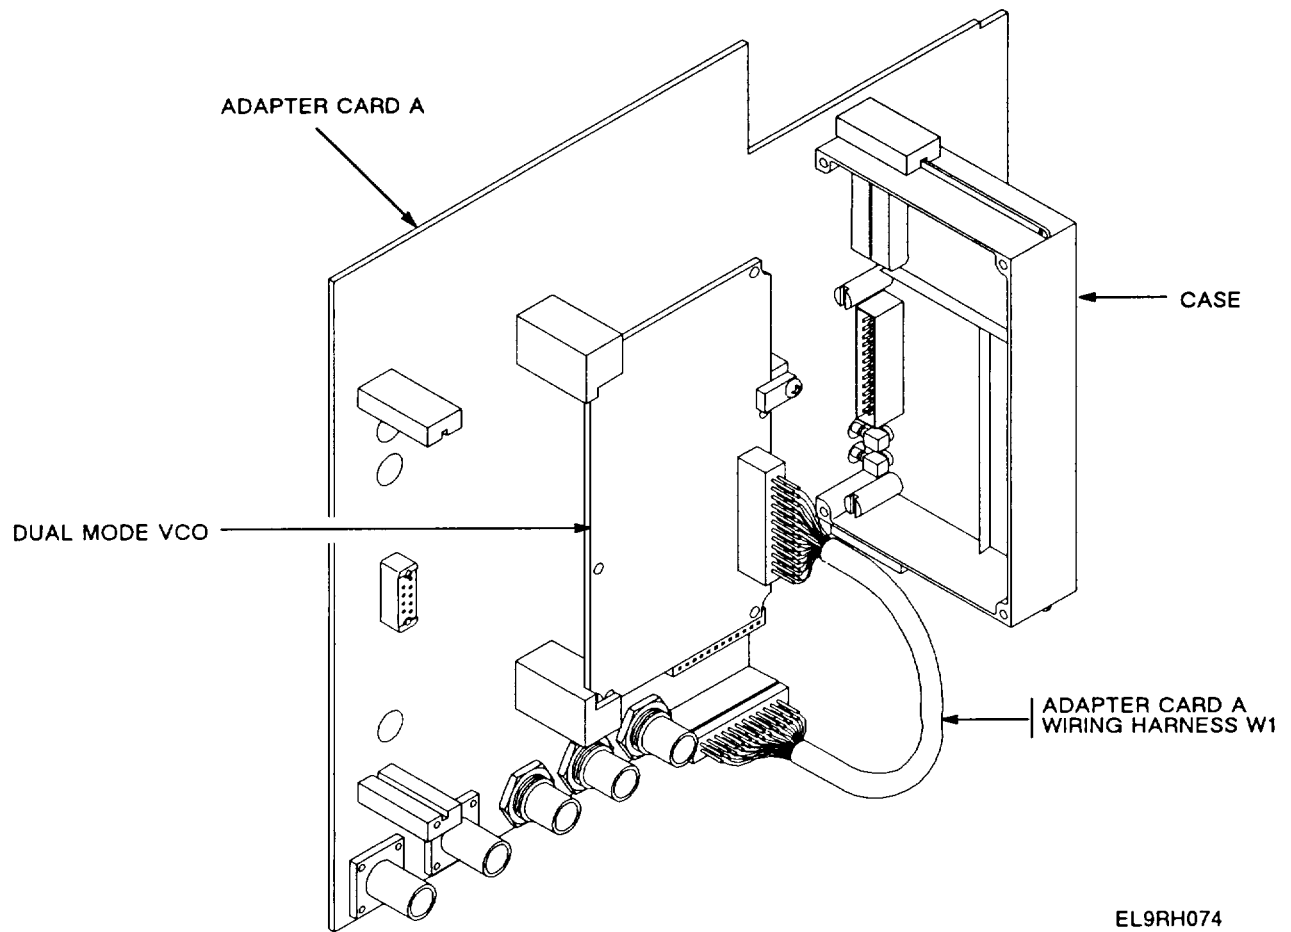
Installation of Disassembled Synthesizer Assembly
